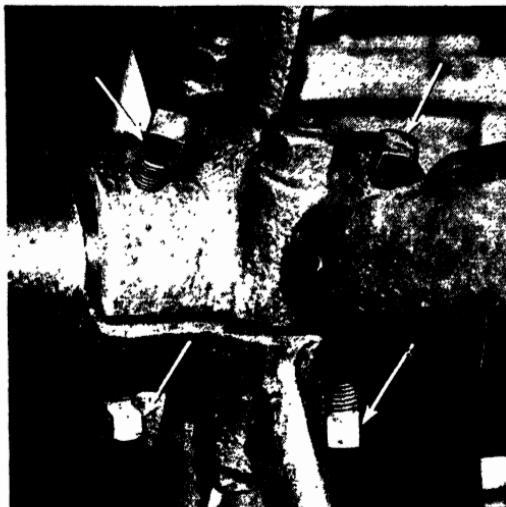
Projecting set screws. (*Courtesy of the Allen Manufacturing Company.*)
